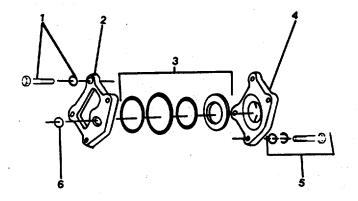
Fuel Pump Fluid Pressure Dampener.
